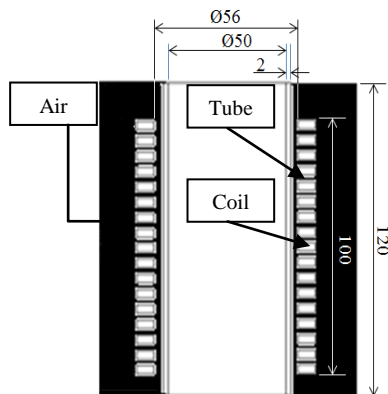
Schematic of model used for electromagnetic tube compression process (All dimensions are in mm.)
